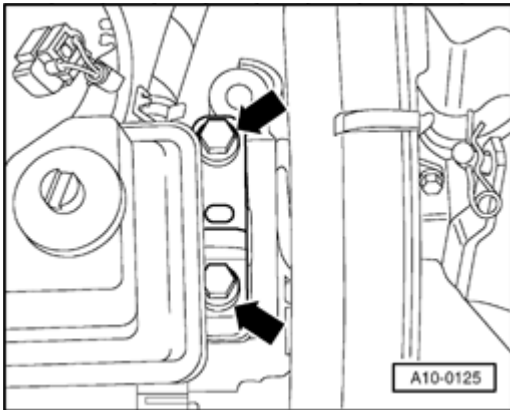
Locating Engine Carrier Bolts (Engine Side)
